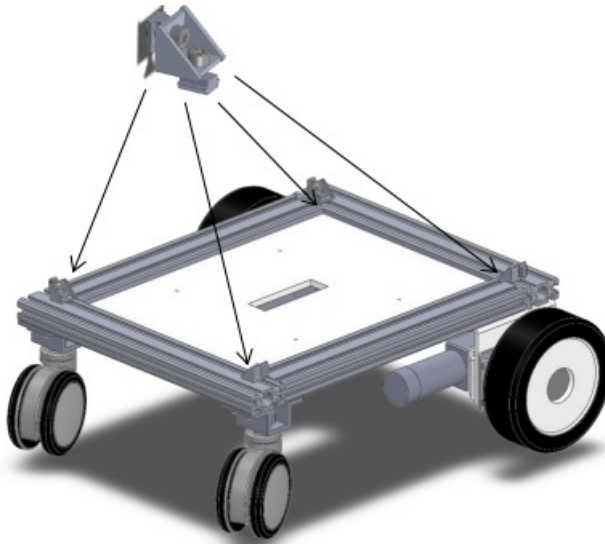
Slide the Triangle Parts of the Fastener in the Platform TFEs
